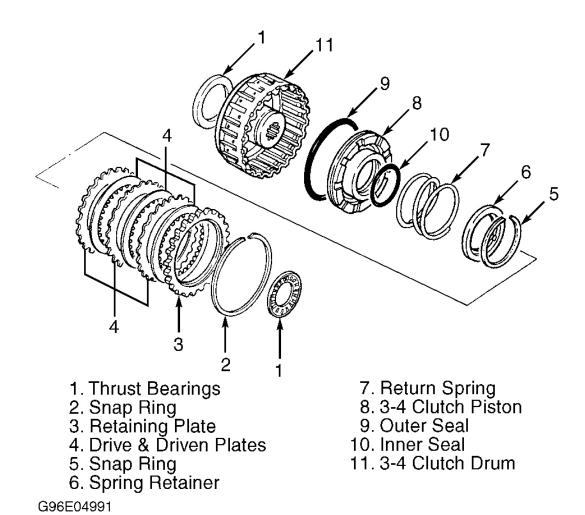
Exploded View Of 3-4 Clutch Courtesy of MAZDA MOTORS CORP.
